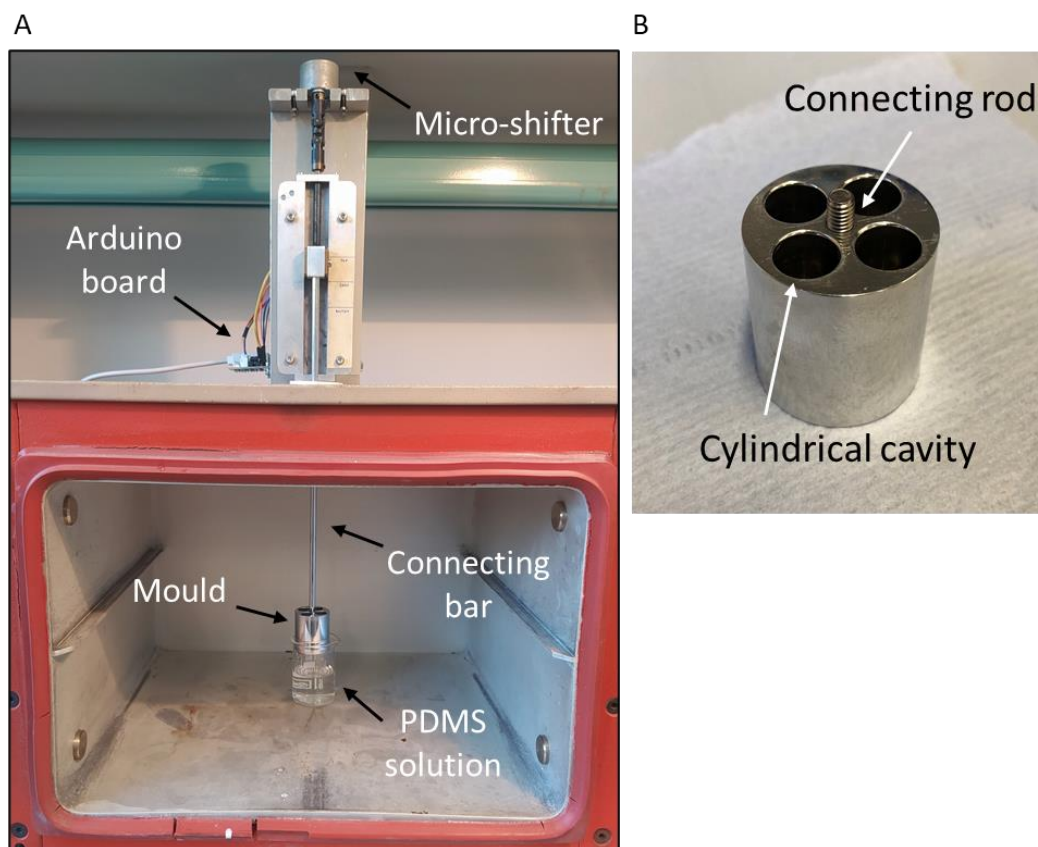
A) Dip-moulding custom-made set-up; B) Aluminium mould.
